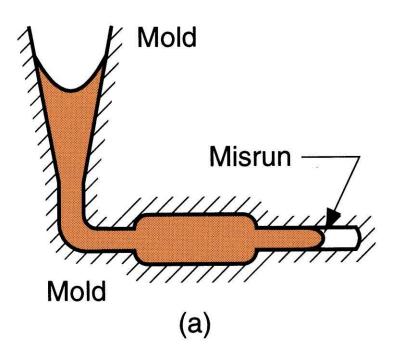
Some common defects in castings: (a) misrun
